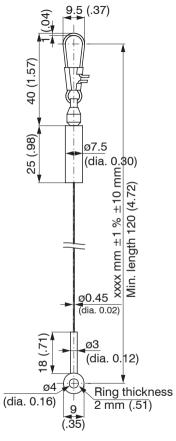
Wire extension WE-xxxx-CLIP, dimensions in mm (inches, rounded off)
